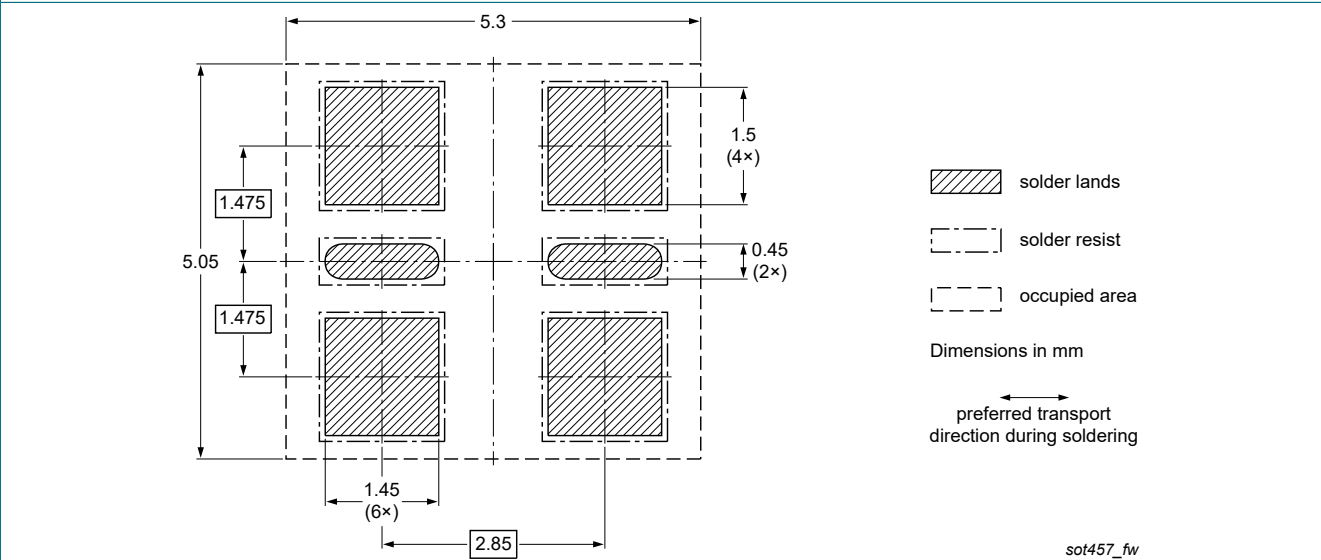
Wave soldering footprint for TSOP6 (SOT457)
